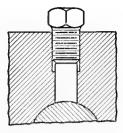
Here the plug is in the form of a rod, which allows the use of a short set-screw. This saves tapping a long hole and using a long screw.
